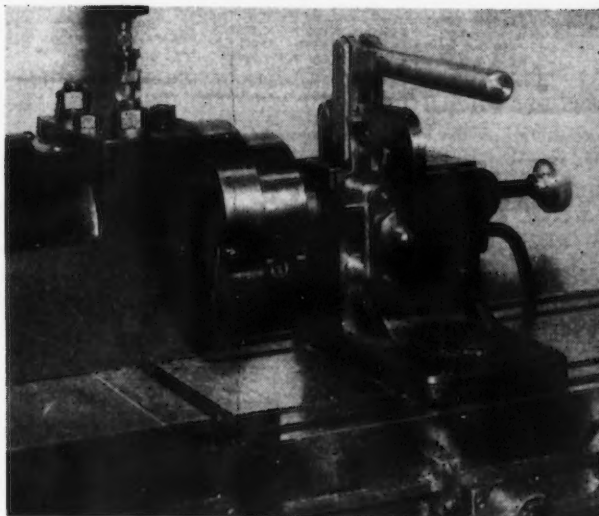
Machine which bores 0.2500 in. hole showing piece clamped in fixture ready for second boring operation.
